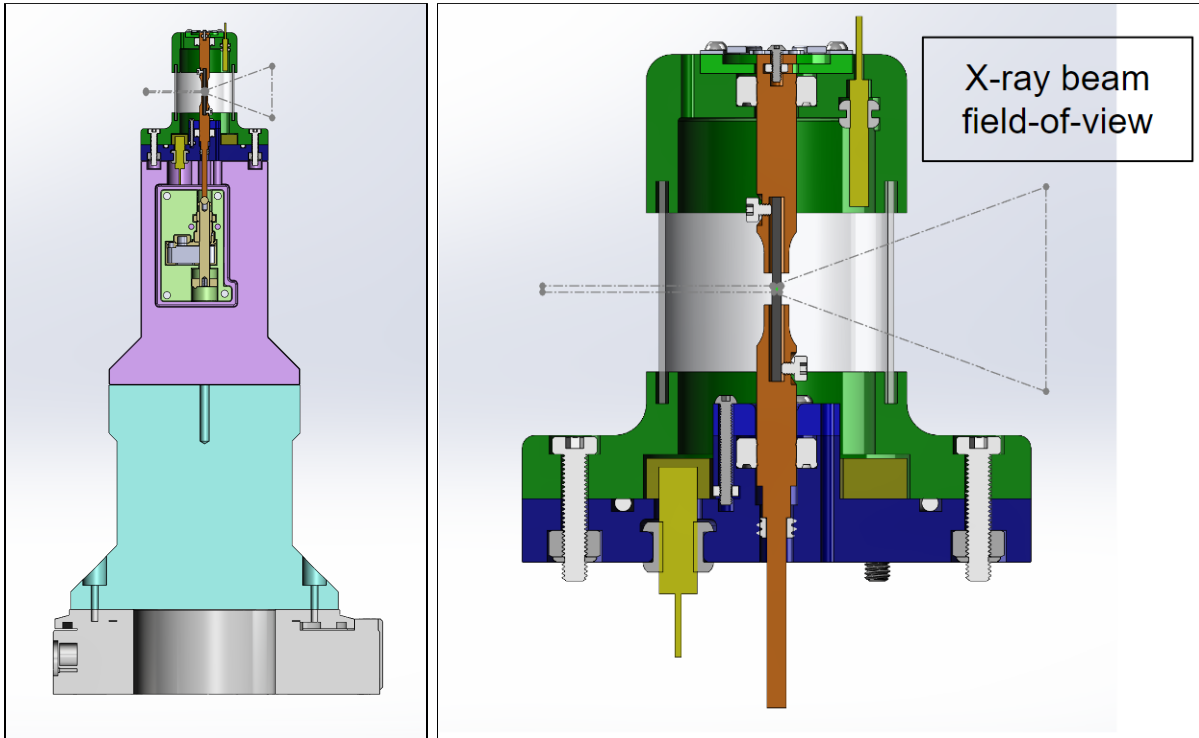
The final design. The sample container and frame (left) are attached to the mounting stage in gray on the bottom. The sample container (right) is shown with the field-of-view of the x-ray beam.
